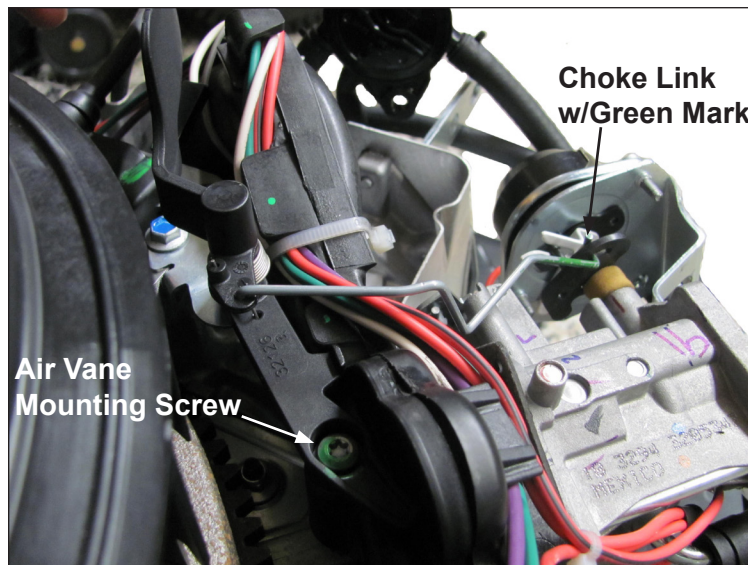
Choke Link 32 079 08-S and Air Vane Detail. (Air Cleaner Assembly Removed for Clarity.)
